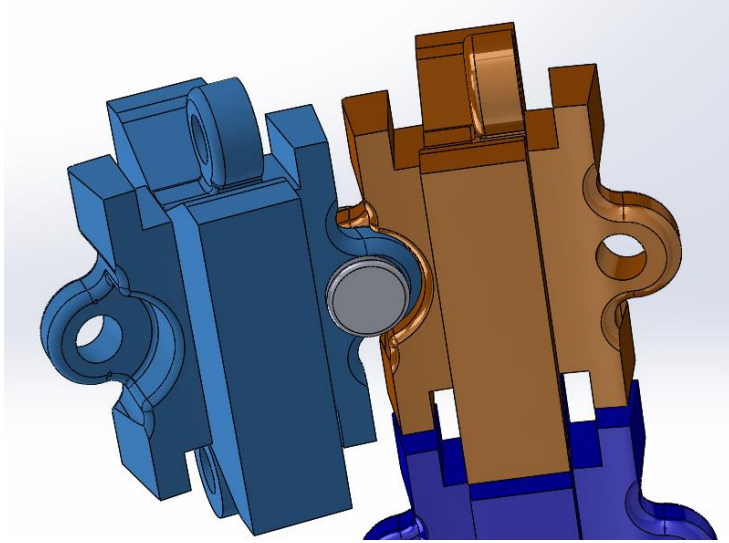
First tooth design for a mechanically-jointed annular comb with interrupted teeth and revolute joints between all links. First view.
